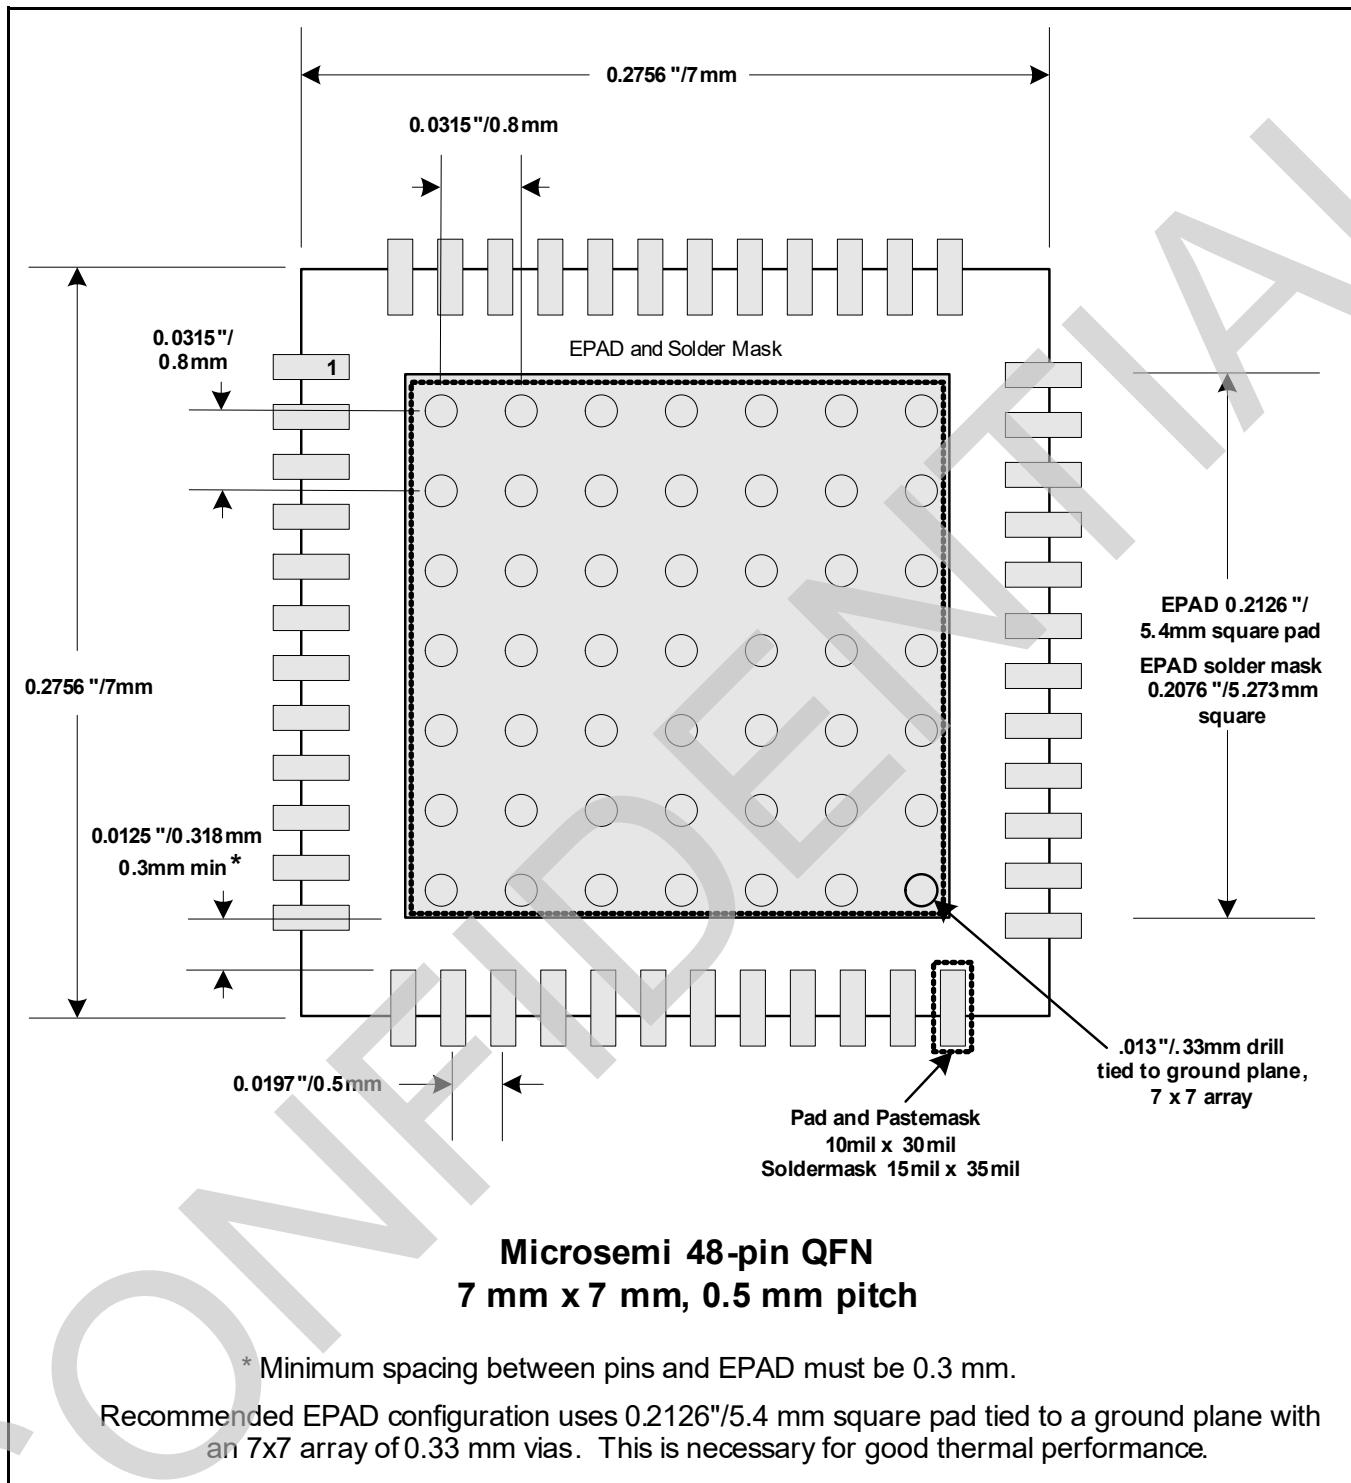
Recommended Land Pattern (48-Pin QFN) – Top View
